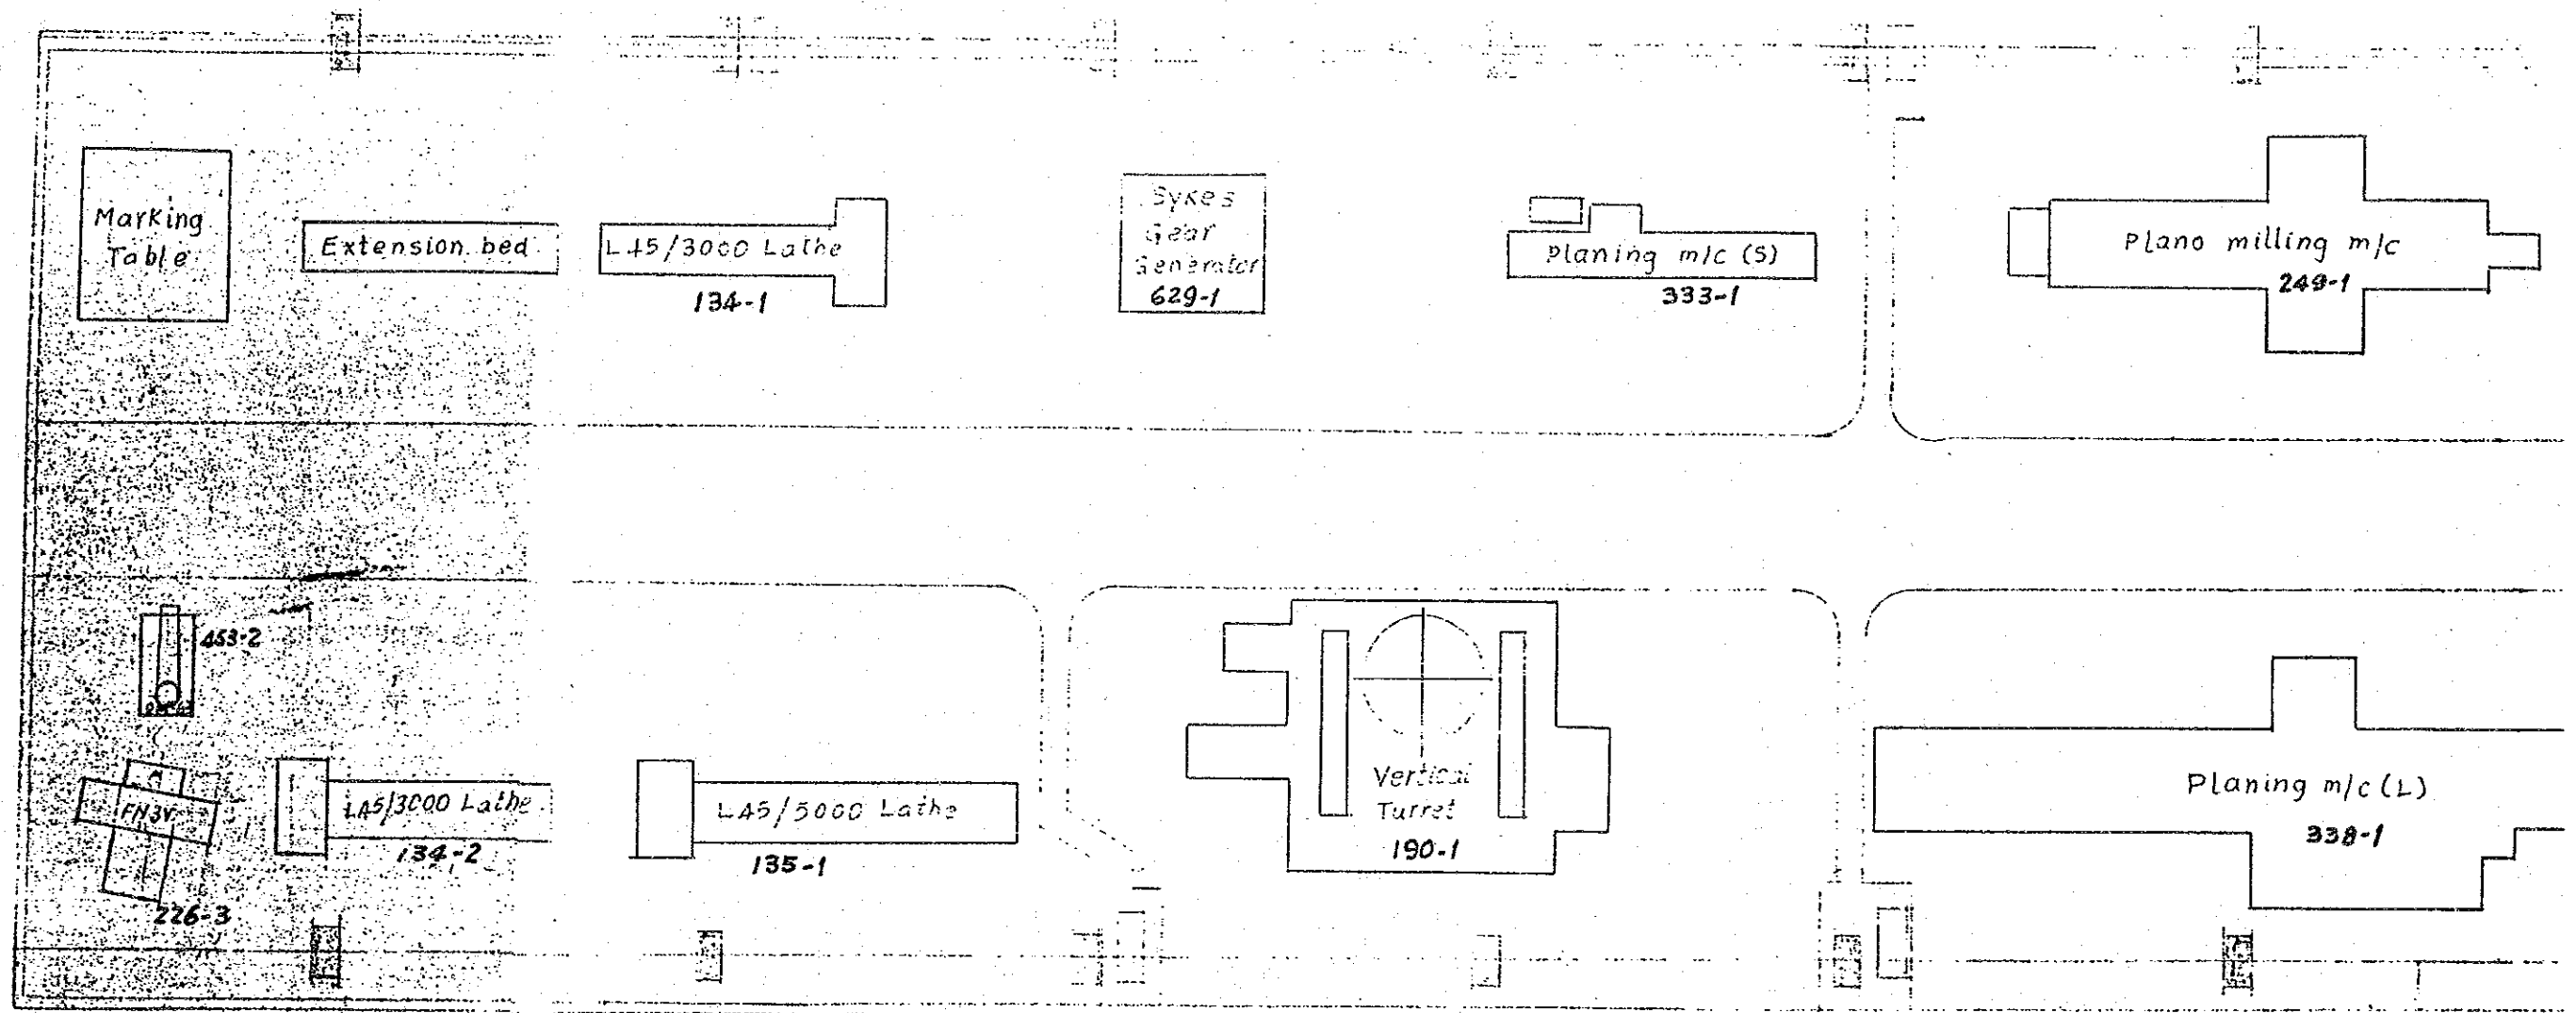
R FACTORY LAYOUT (RENOVATION PLAN)
